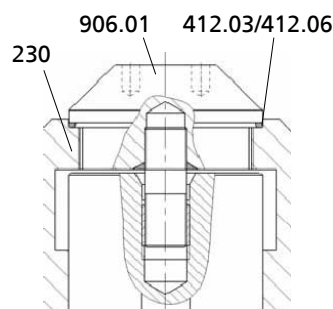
Fitting the impeller of Sewatec E 200-401 (Ø 373 mm, bearing bracket S06), K 350-710, K 500-632 and K 500-640
